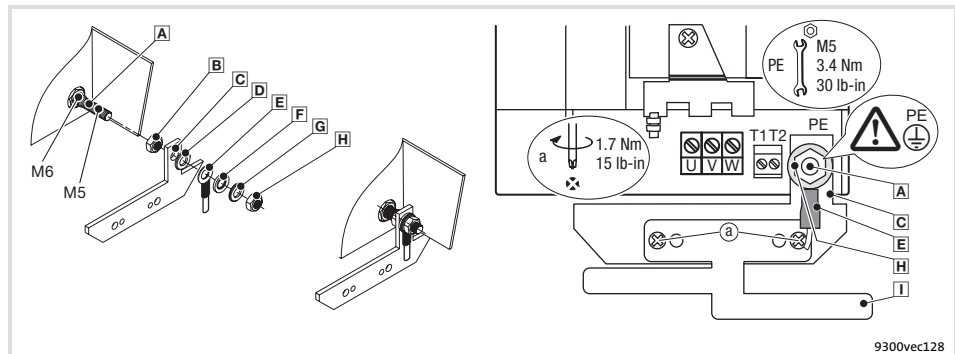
Installation of shield sheet for drive controllers 0.37 ... 11 kW
